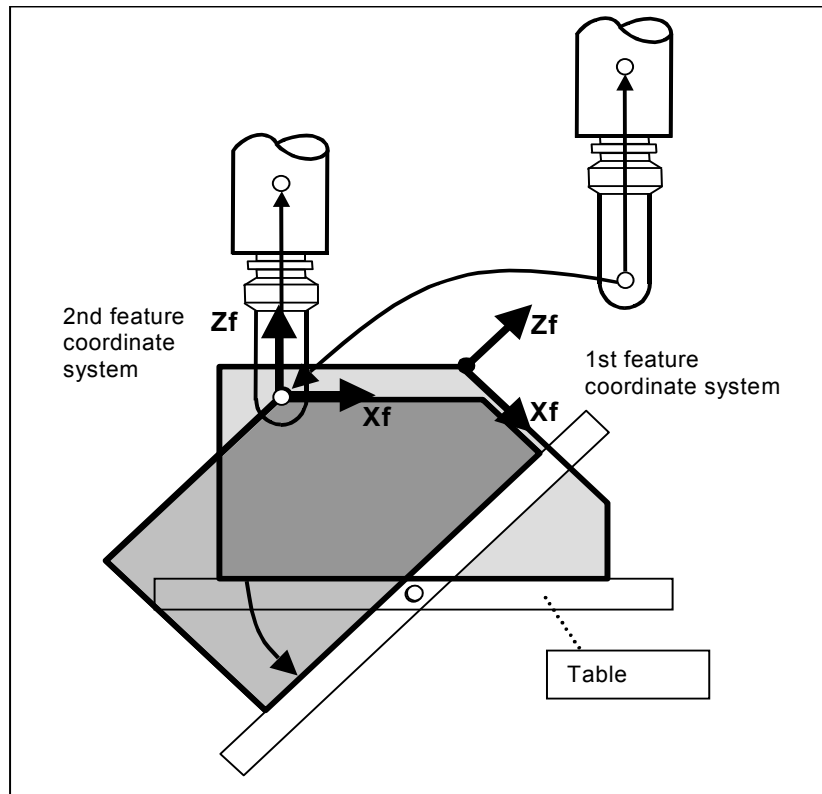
(d) Operation of tool center point retention type tool axis direction control specified with end point of tool center point (table rotation type)
